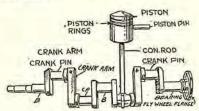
A solid type of crank shaft—three-bearing type, four-cylinder.
